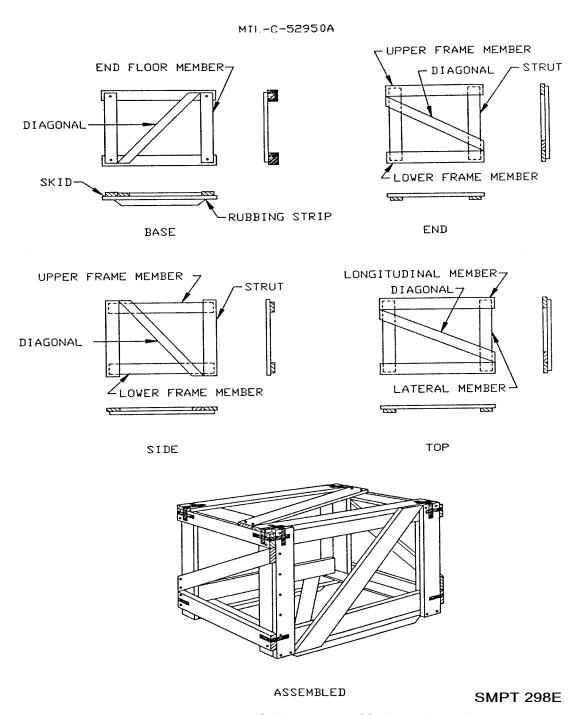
Type I, style A crate assembly (MIL-C-52950).
